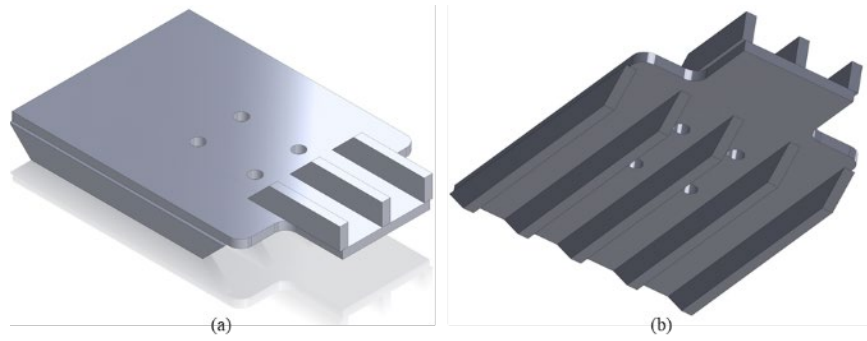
Half Section of the Structural Member Connecting the Railway Wheelsets to the Leaf Spring Suspension with (a) Top and (b) Bottom Angled Views
